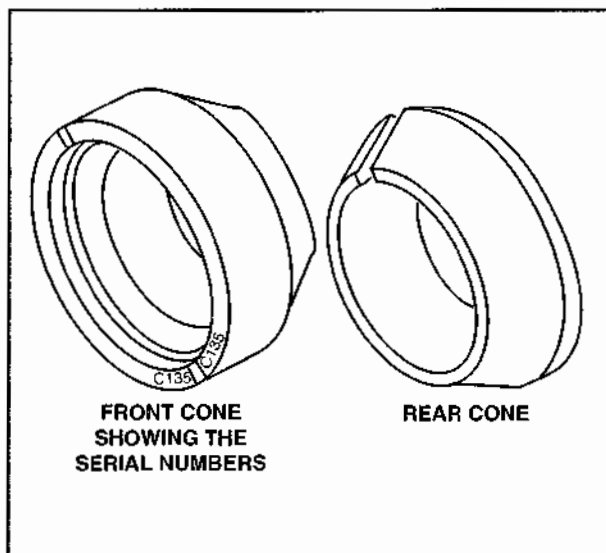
Splined propeller shafts require front and rear mounting cones to ensure that the propeller is properly aligned on the shaft.
